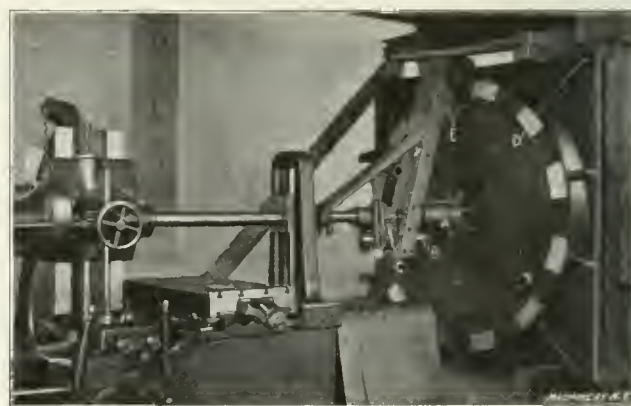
Universal Chuck for Holding Center Drill, and Stop for Drill Feed
